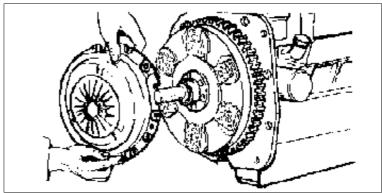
Installing clutch assembly through n. 5.9030.256.4/10 equipment.
